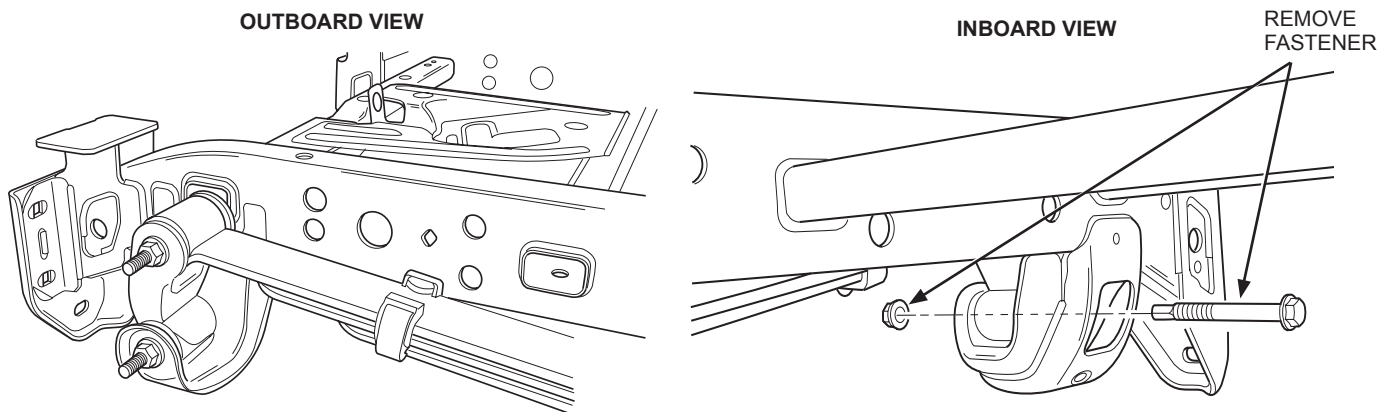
VIEW OF REAR SPRING ASSEMBLY IN THE SHACKLE BRACKET AND WHICH FASTENER TO REMOVE, RH SHOWN, LH IS SYMMETRICALLY OPPOSITE
